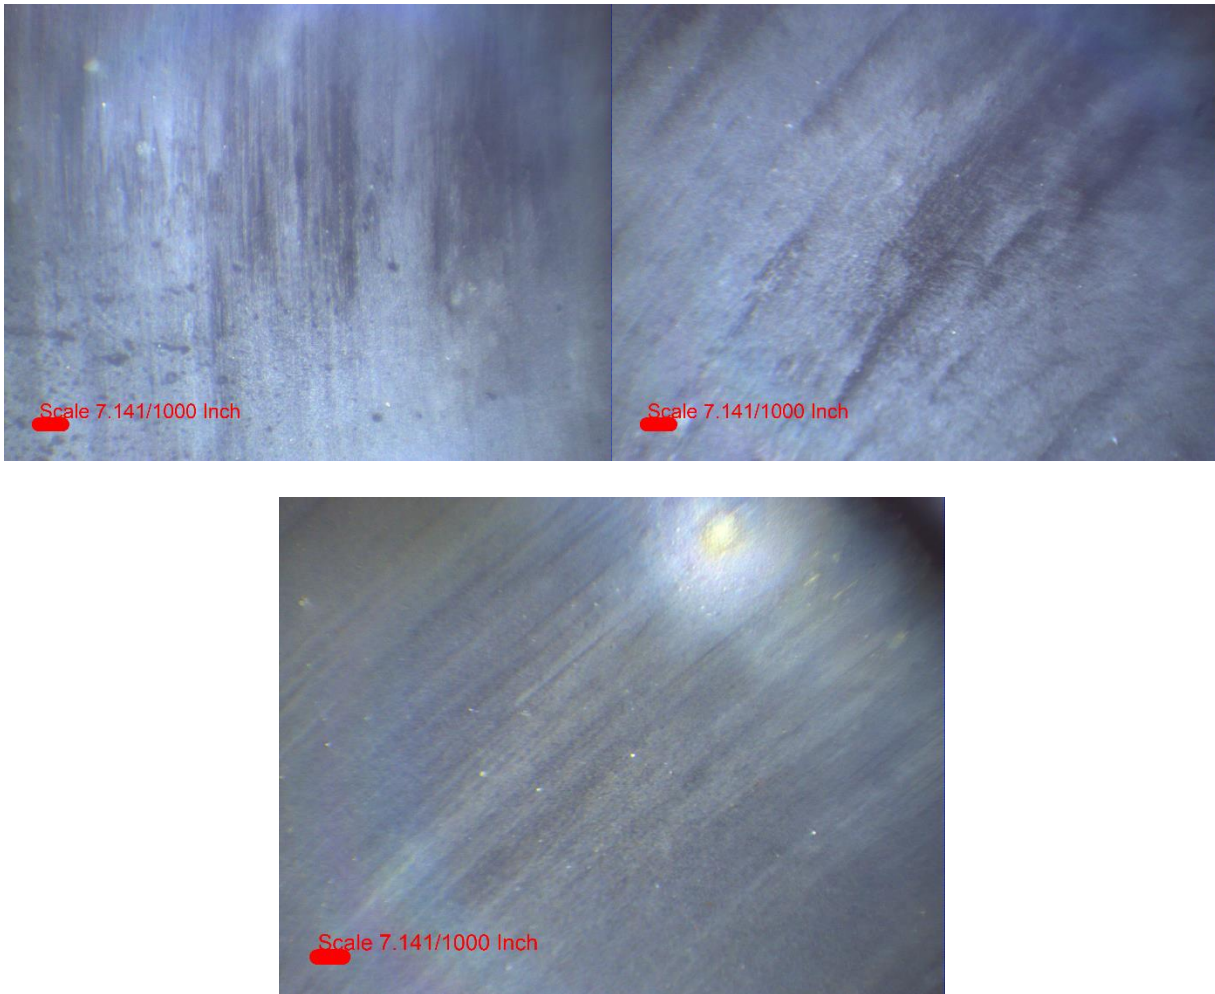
Microscopic view of wear on WC bearing pad for 3600 RPM. Top left: pad 1. Top right: pad 2. Bottom: pad 3. No appreciable wear can be seen
